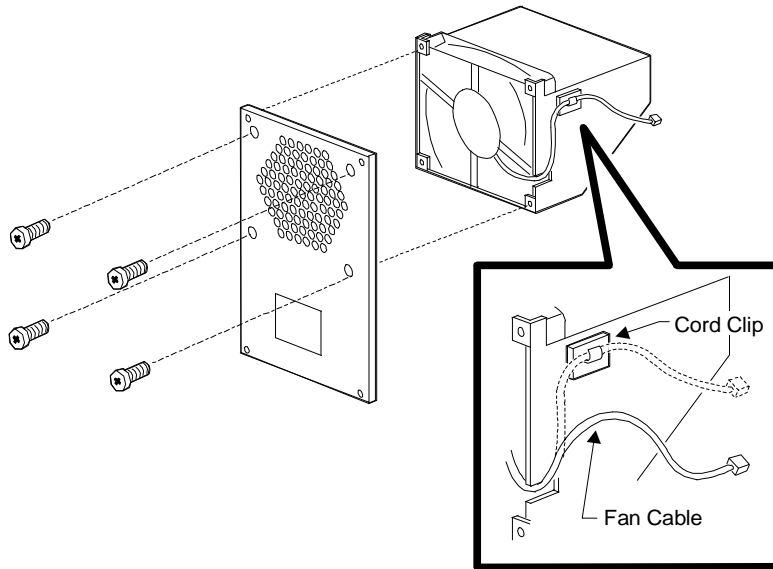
Removing the Fan Cable and Fan Assembly Screws
